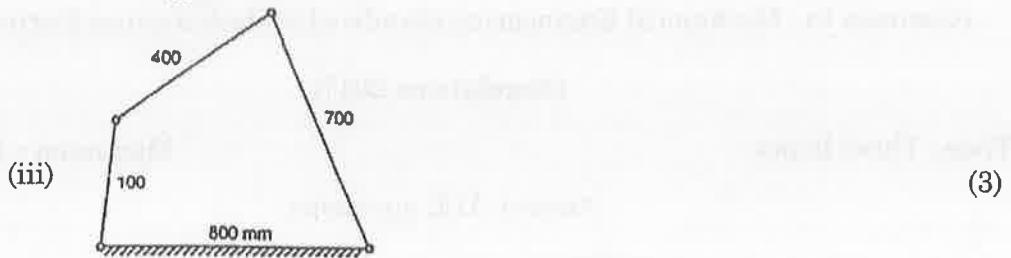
(a) Four-bar mechanism All dimensions are in 'mm'
